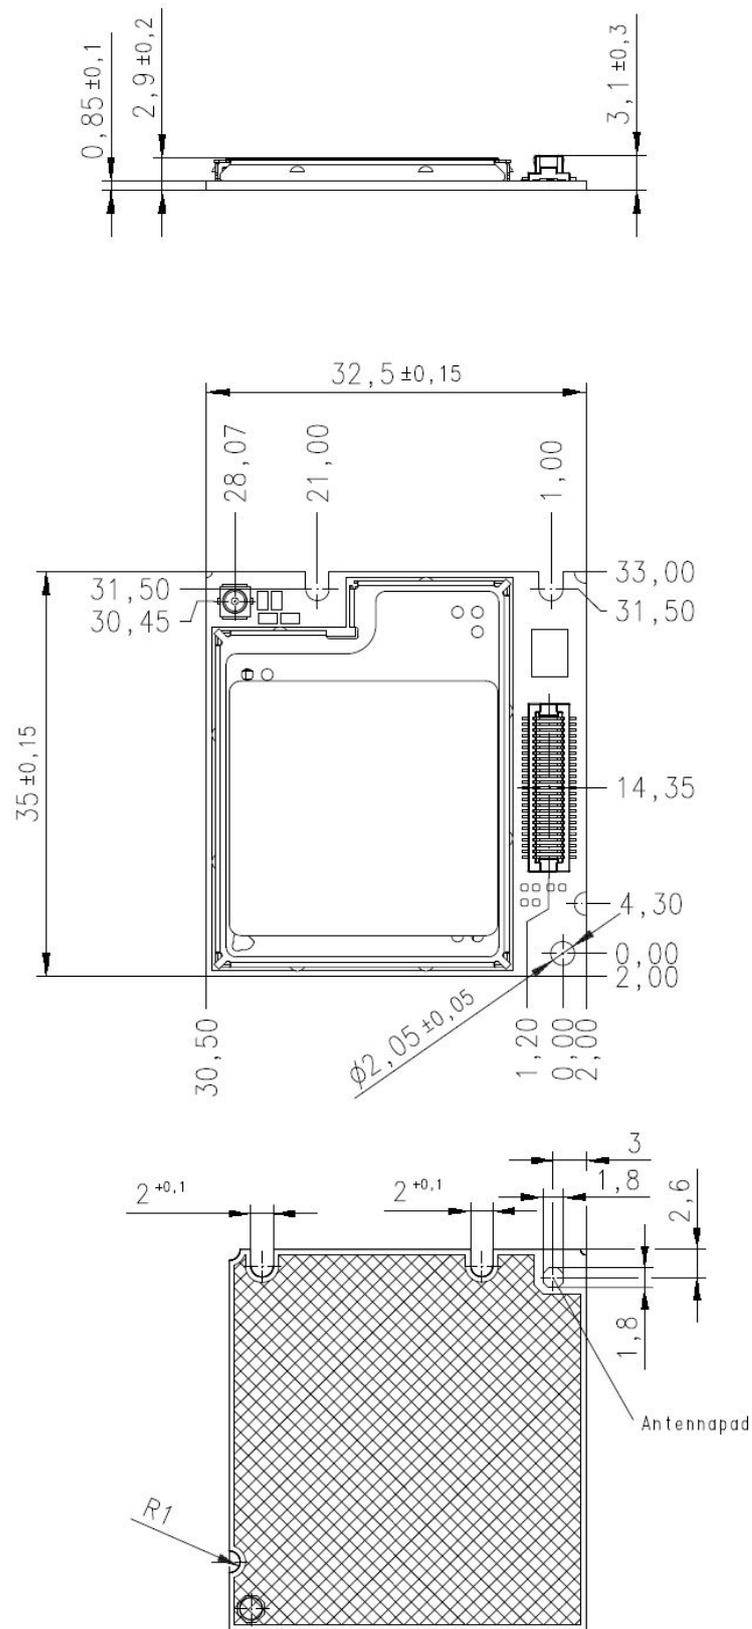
Mechanical dimensions of MG21 (all dimensions in millimeters)
